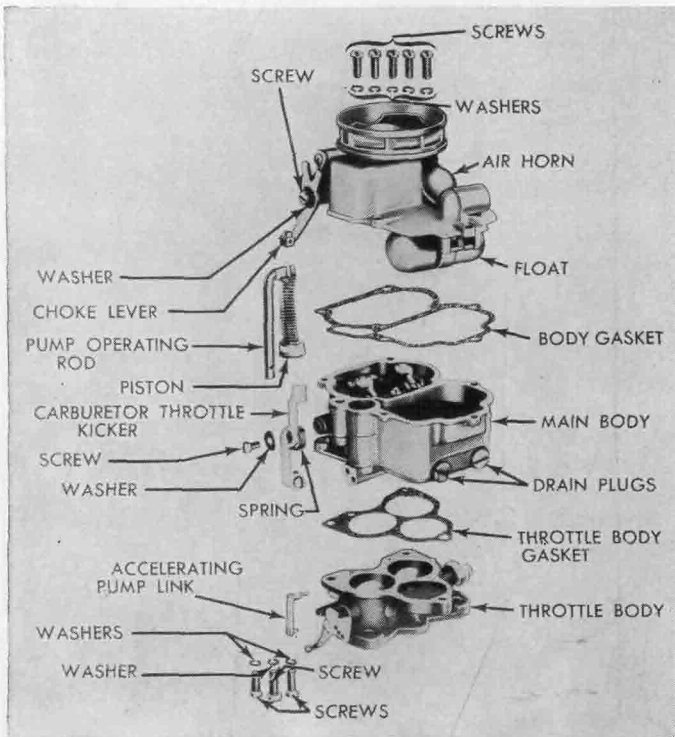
Disassembled view of carburetor. (Ford Motor Company)
